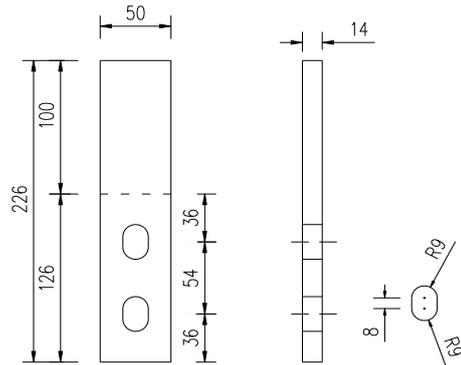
Test Steel Plate Contact Area Dimension (Unit: mm)
